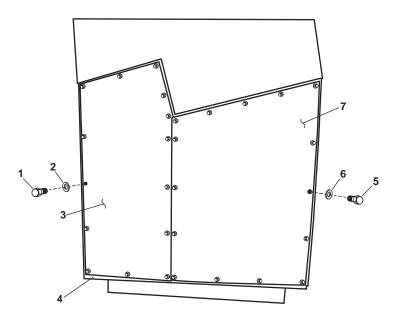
Towing Machine Control Panel (Operator) Aft and Forward Panels
